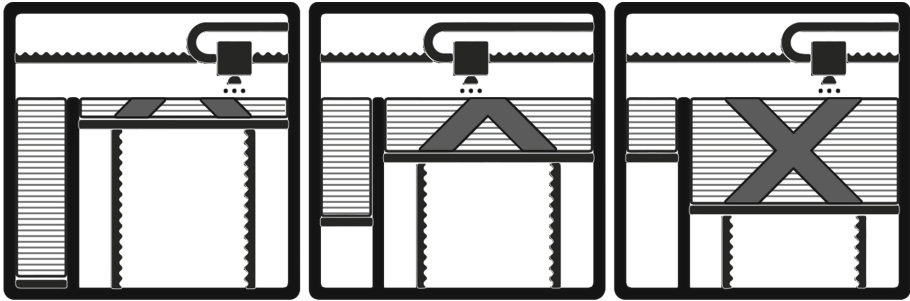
Example of Binder Jet 3D printing: the previously deposited material supports the printed parts throughout the whole process.
